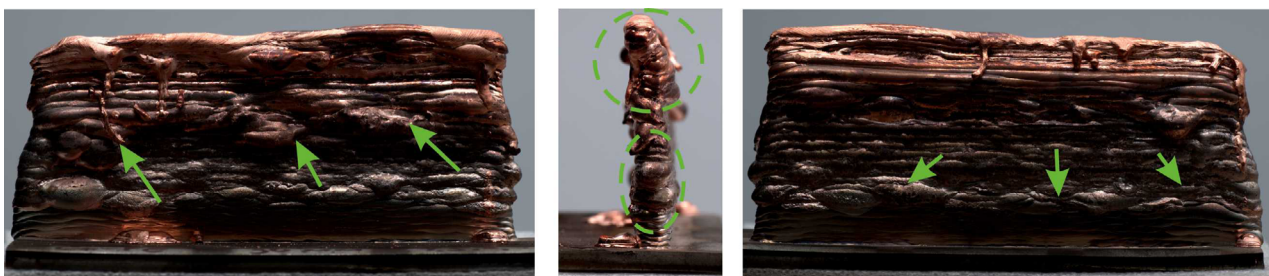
Defects observed during copper wire deposition in EBAM bimetal fabrication due to improperly selected parameters
